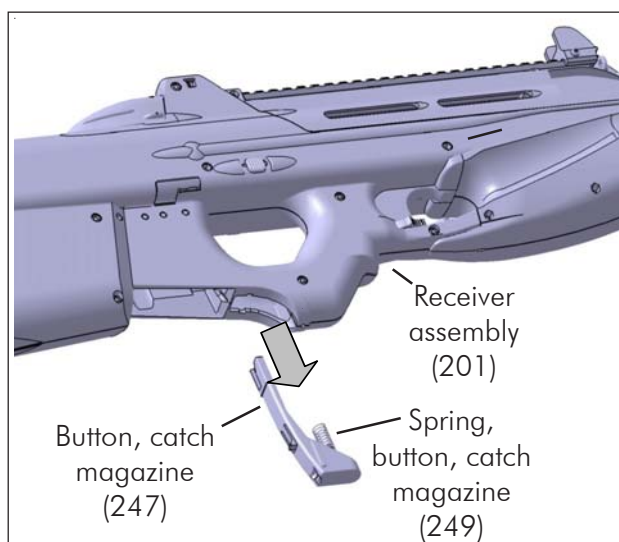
c - Removal of the spring, button, catch magazine (249)
